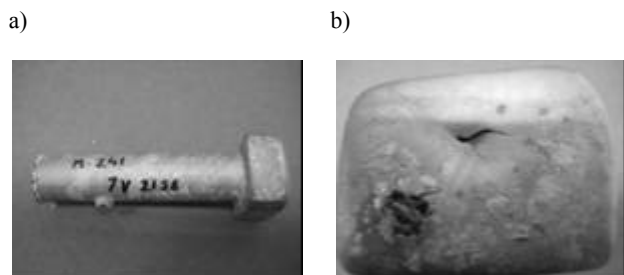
Side and upper surface of test casting made from MAR-247 (3V 4253)
